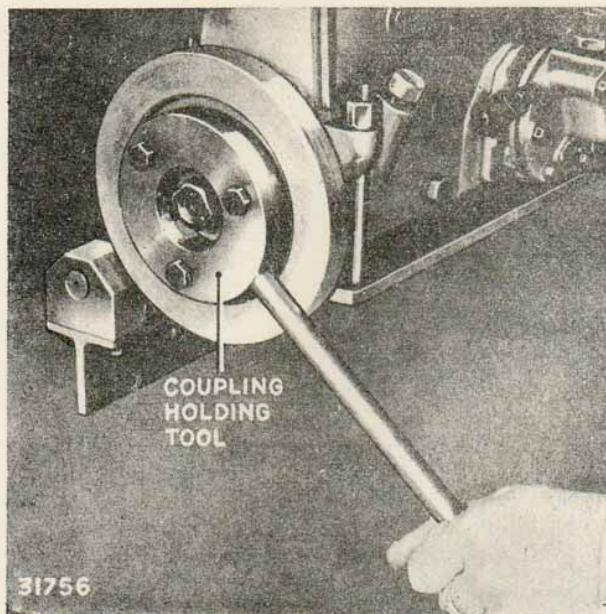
HOLDING INJECTION PUMP FLYWHEEL.      FIG. 23. REMOVING INJECTION PUMP FLYWHEEL.
